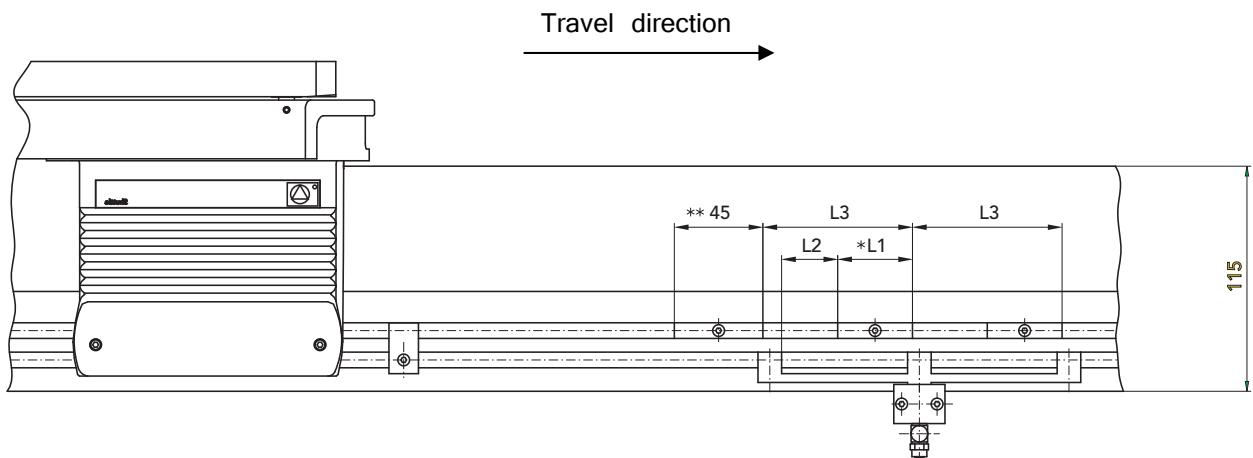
Arrangement of the control cams for MPV (spacing L3 ≤ 90 mm)
